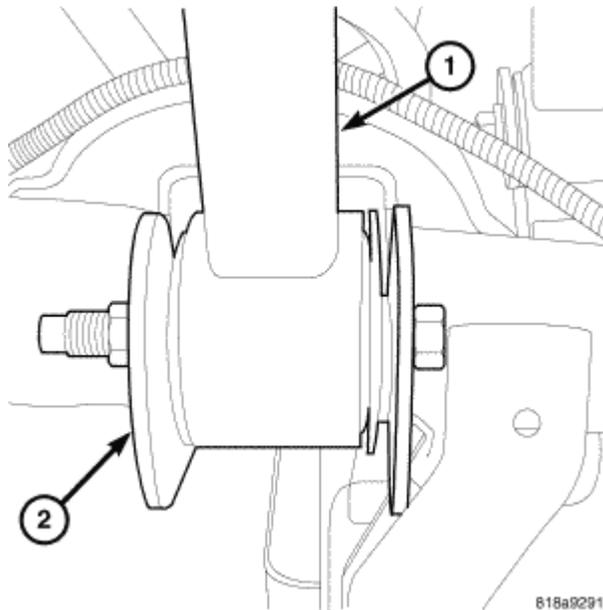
Identifying Lower Control Arm & Axle Brackets
